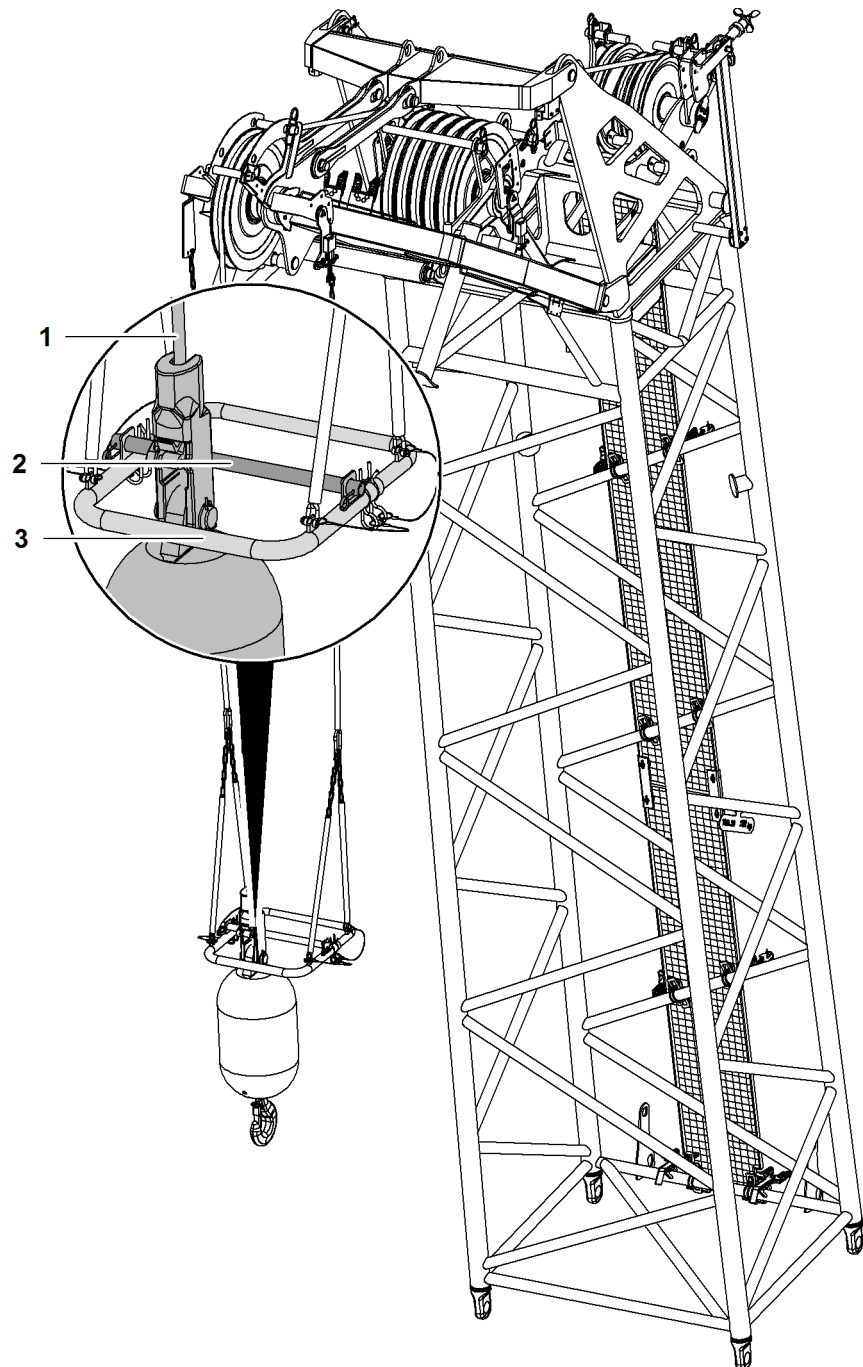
Installing hoist limit switch bracket with single reeving on auxiliary jib head (36 t)
